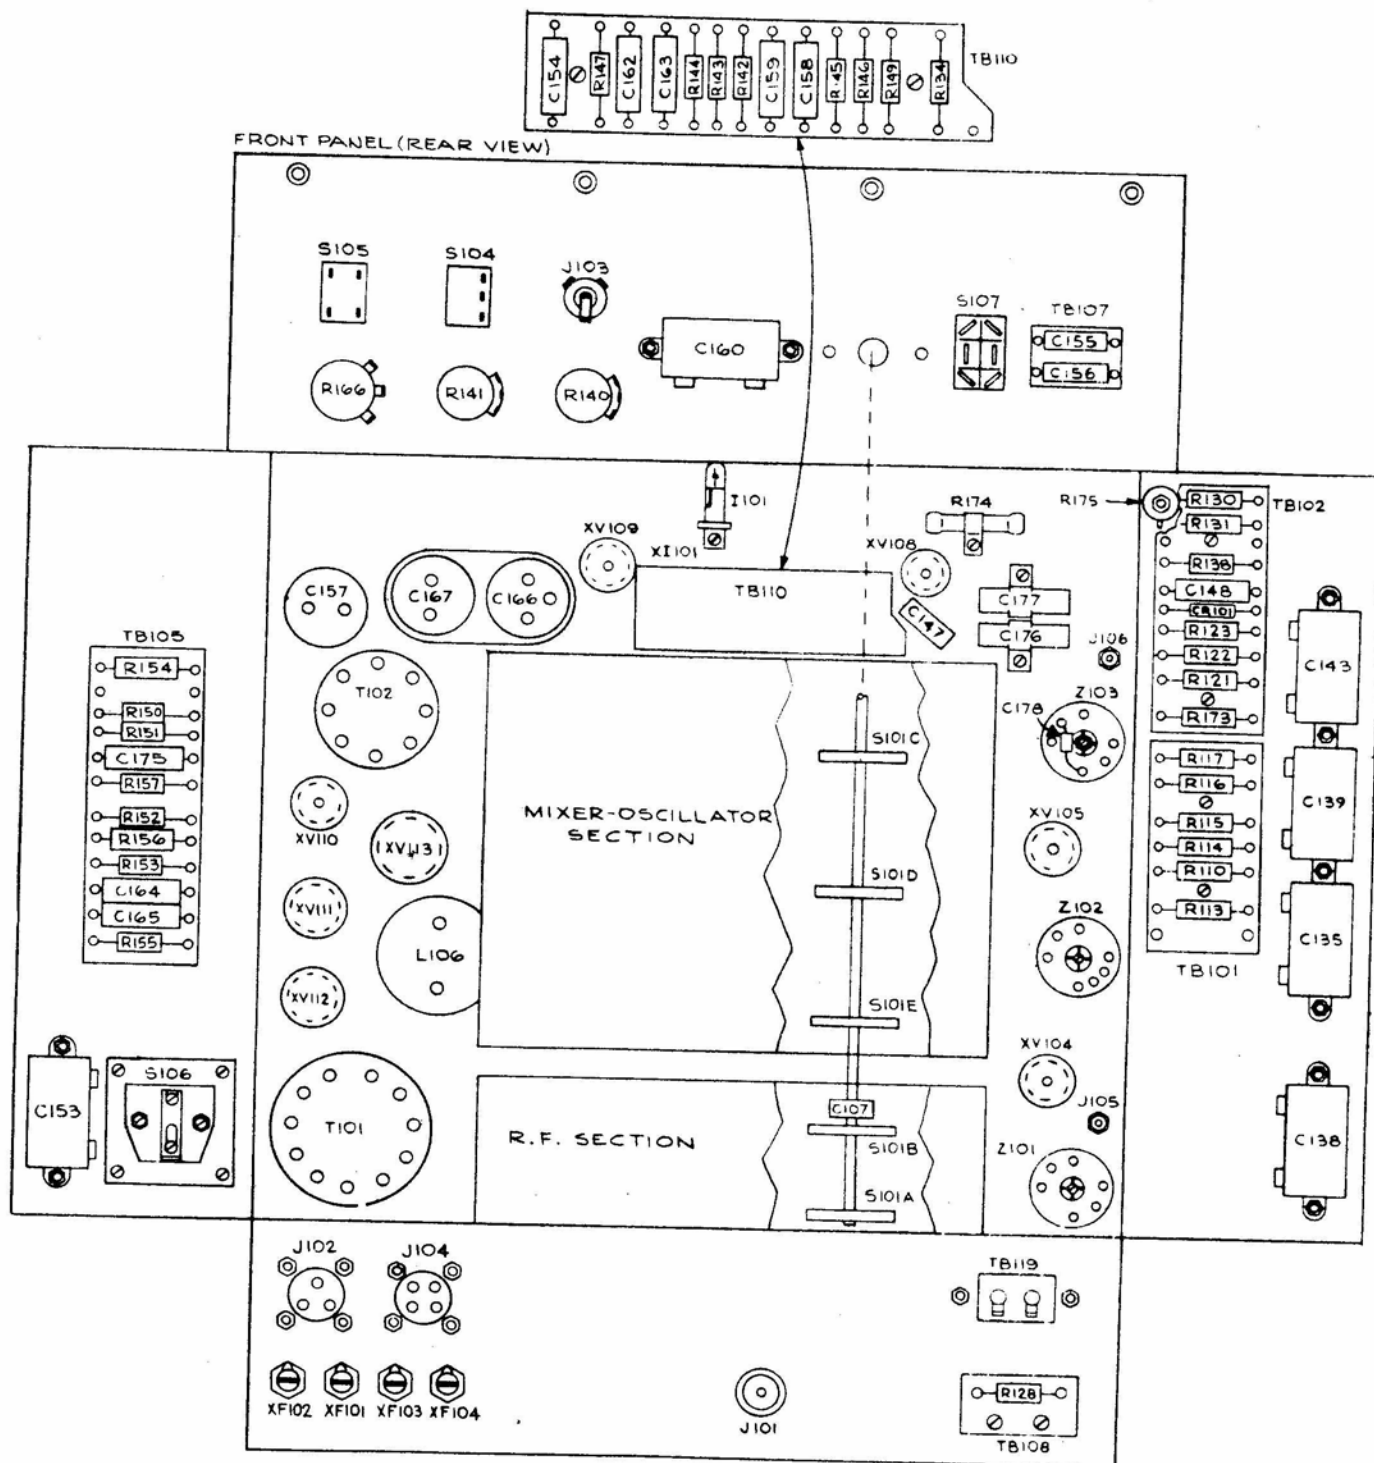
Receiver Chassis Bottom View, Parts Location Diagram, Part 1
